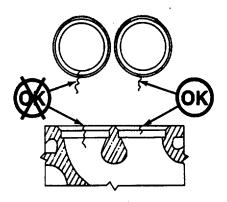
Valve Seat Insert Bore Inspection.
